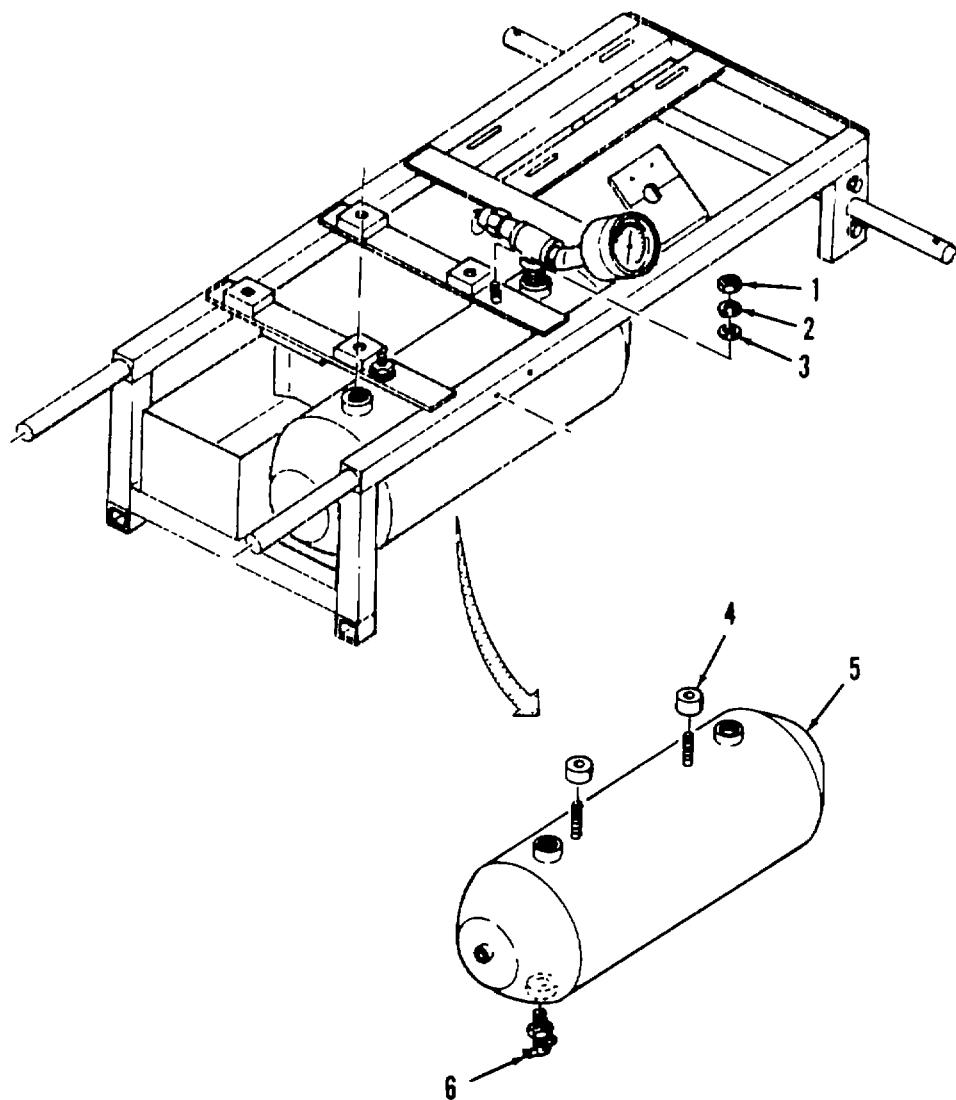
Vibration Mounts , Air Receiver, and Drain Cock
